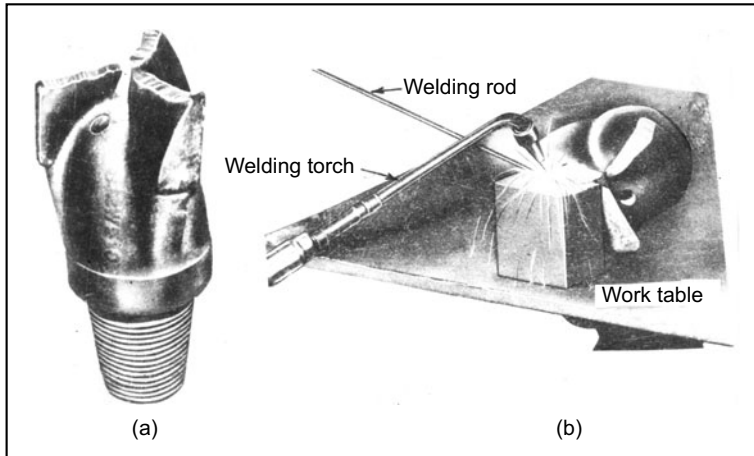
Dressing of a worn drag bit: (a) Worn drag bit, (b) Building up the surface of the cutting edge with a high-strength steel welding rod, using oxy-acetylene torch to fuse the new metal to the worn edges
